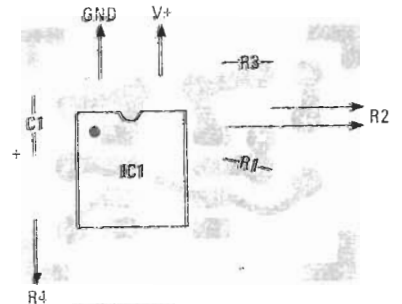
COMPONENT PLACEMENT and connections to parts and points not on the board.
